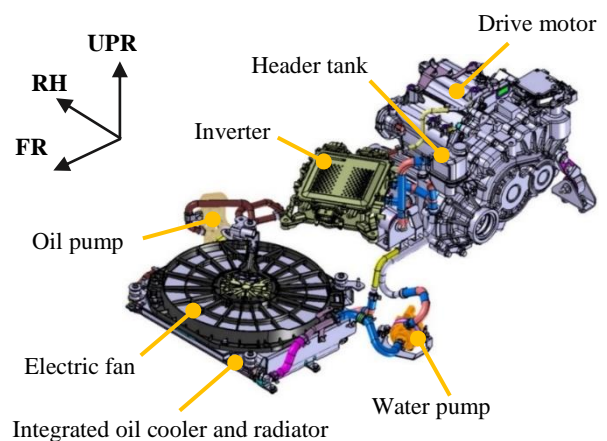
Outline of Drive Motor and Inverter Cooling Circuit
